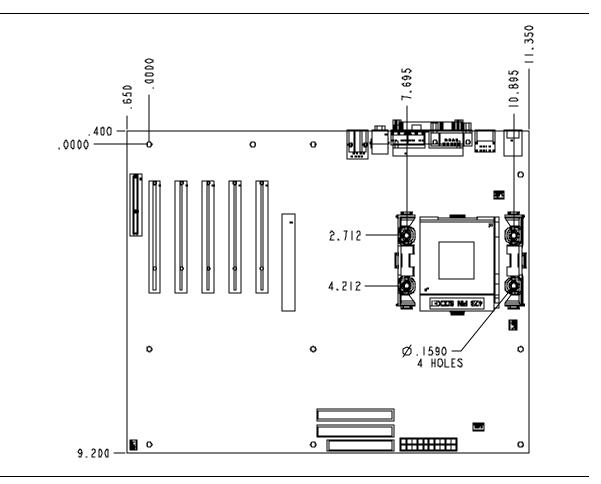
ATX Motherboard Hole Locations for Direct Chassis-Attach
